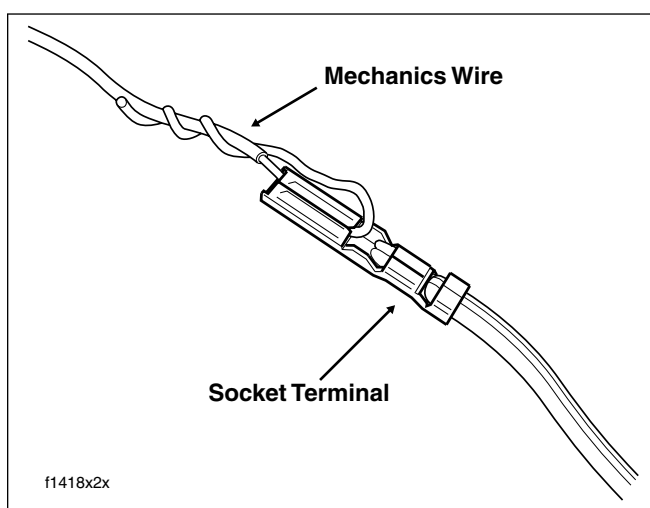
Fix Mechanics Wire to Socket Terminals
